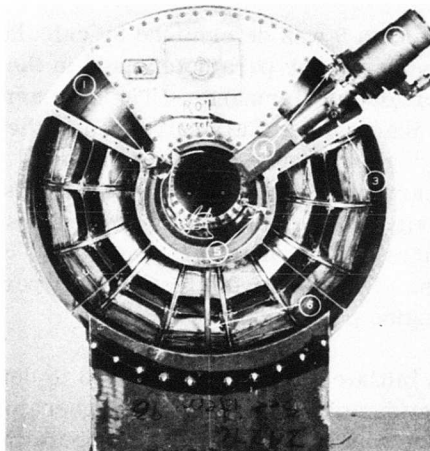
Cold Side (Front) of Rotary Regenerator Assembled for Mass Loss Test: (1) Breather Connector, (2) Orbit Drive Motor, (3) Drive Bearing Oil Fitting, (4) Magnetic Speed Pickup, (5) Rig Bearing Oil Fitting, (6) Oil Scavenge Line.
